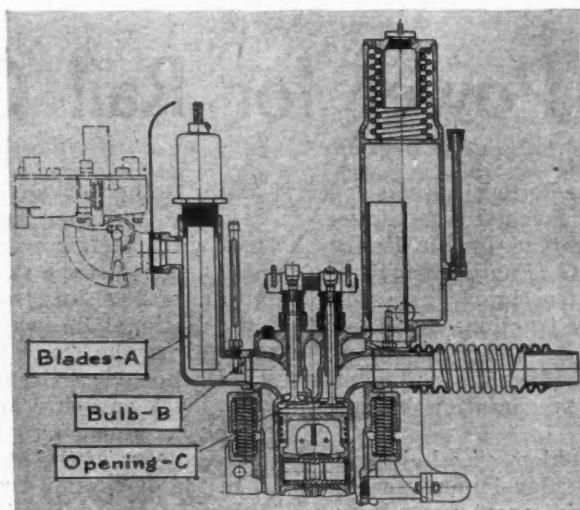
Sectional view of C.F.R. engine cylinder head, showing electric mixture heater, shrouded intake valve, and improved type of vapor condenser
